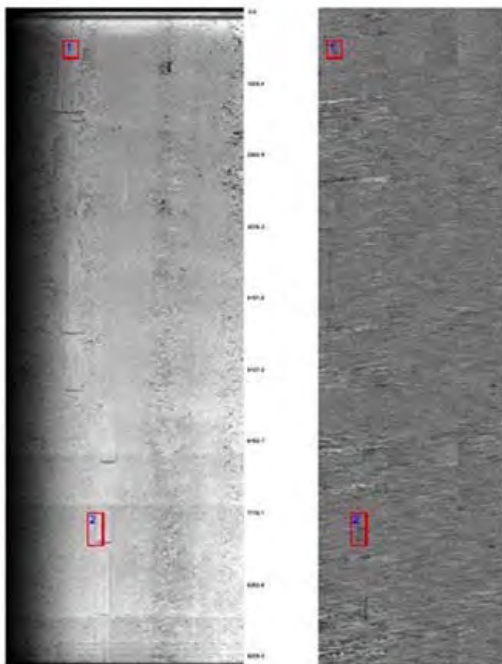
Examples of surface defects detected from CH with on-line surface inspection of slabs
